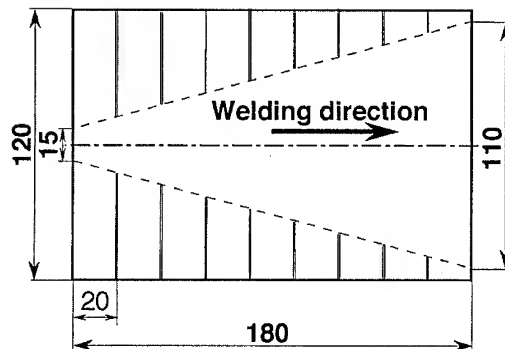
Specimen dimensions of the modified Houldcraft solidification crack test
